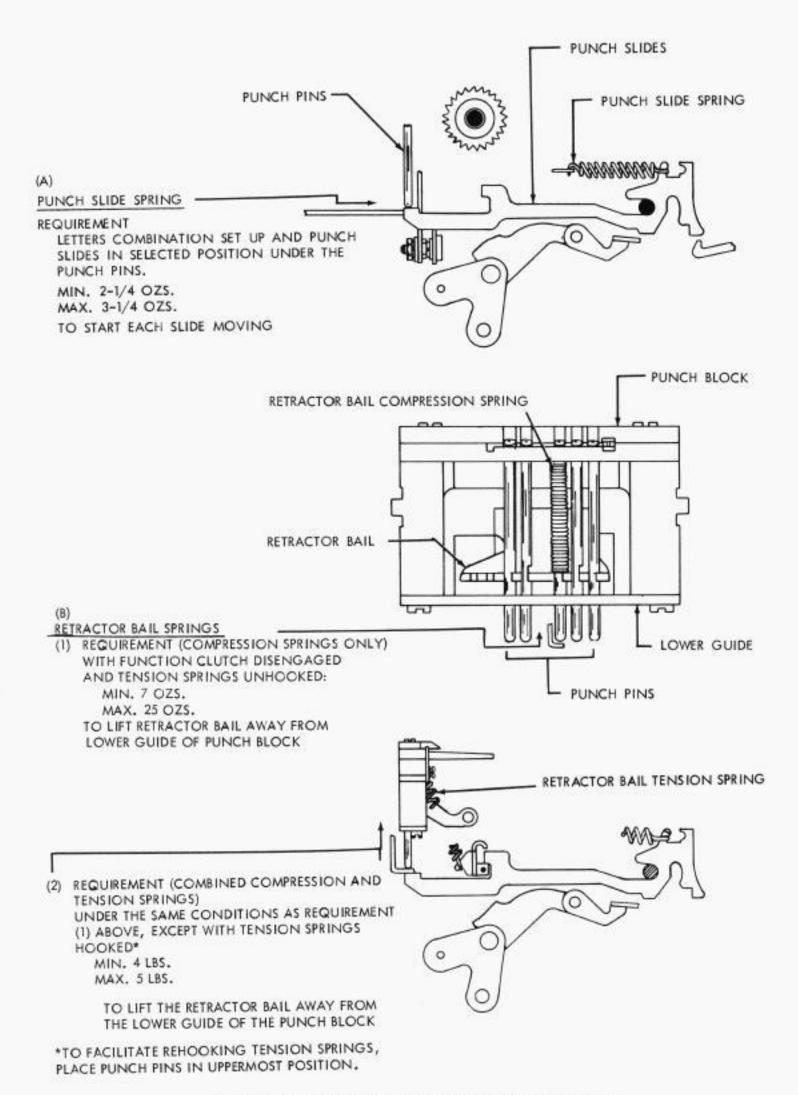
PERFORATOR MECHANISM FOR CHADLESS TAPE
